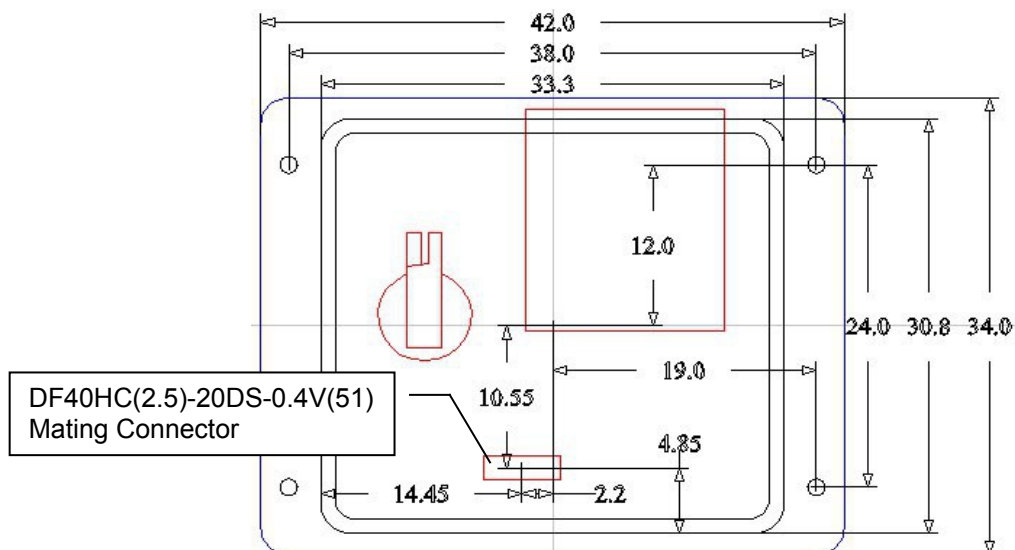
GPAR12x_SPACER drawing showing location of mating connector
